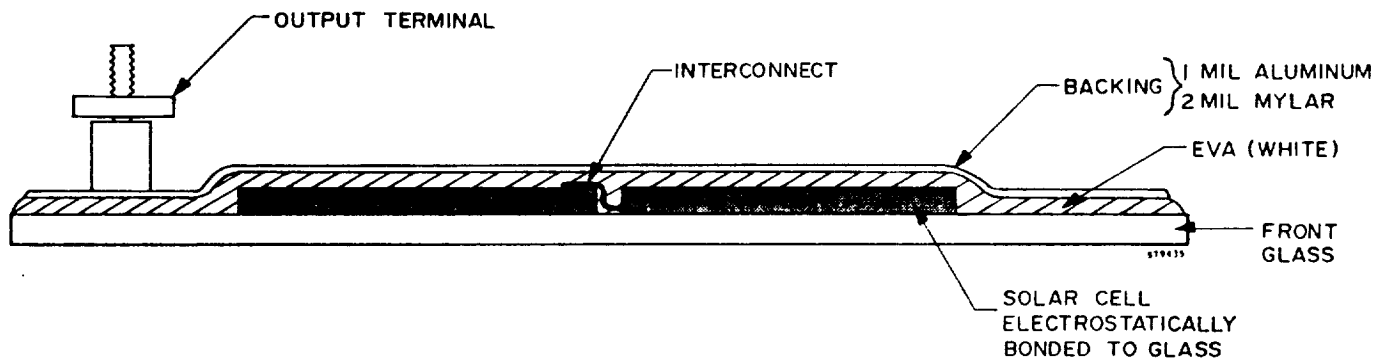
Cross-Sectional View of Integral Front, Electrostatically Bonded Module Assembly
